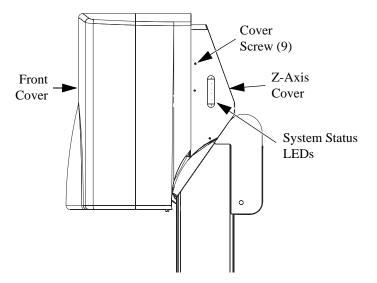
Removing the Front Cover and Z-Axis Cover
